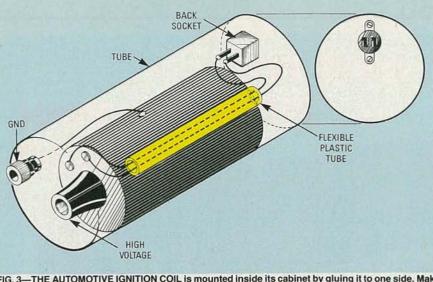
THE AUTOMOTIVE IGNITION COIL is mounted inside its cabinet by gluing it to one side. Make the ground connection by soldering a wire to the side of the coil housing and connecting the other end to the cabinet-mounted binding post.
